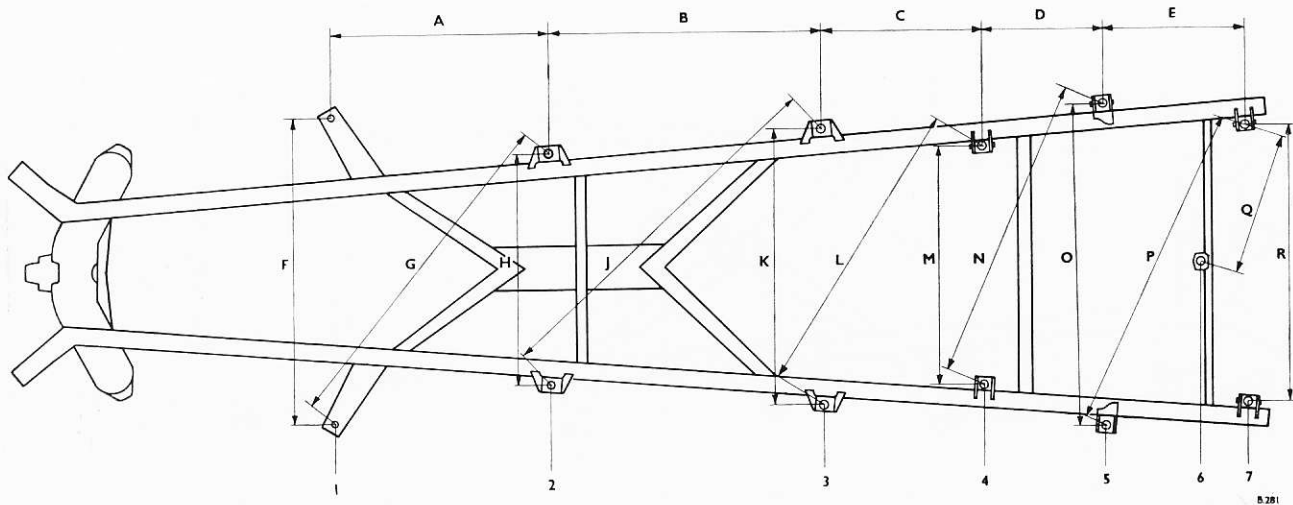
Chassis frame and body checking dimensions for Phantom V cars
